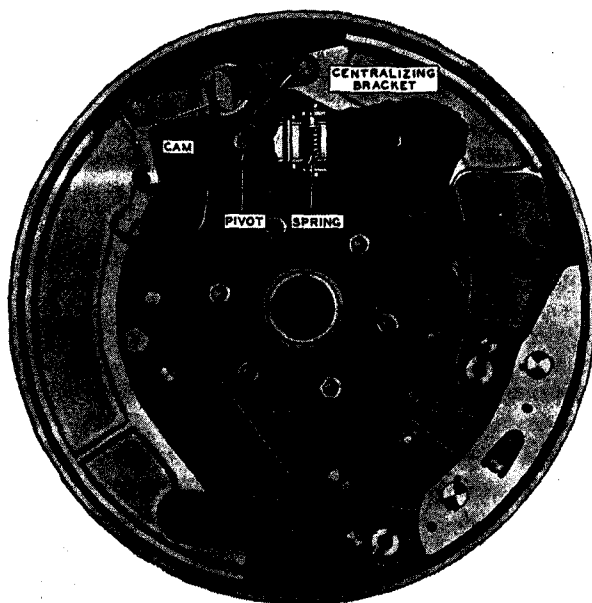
Cam centralizing mechanism in Cadillac left rear brake.
